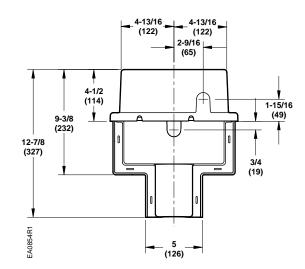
Dimensions of 599-10071 Weather Shield in Inches (Millimeters).
